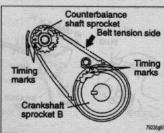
Timing belt B installation mark alignment- 2.0L turbo
